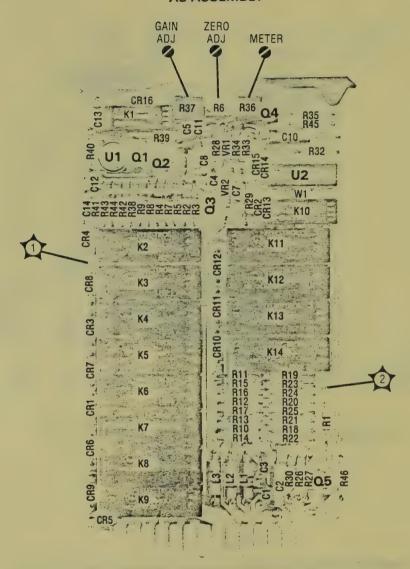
A3 Remote Attenuation Assembly Component Location (P/O Change 7)
